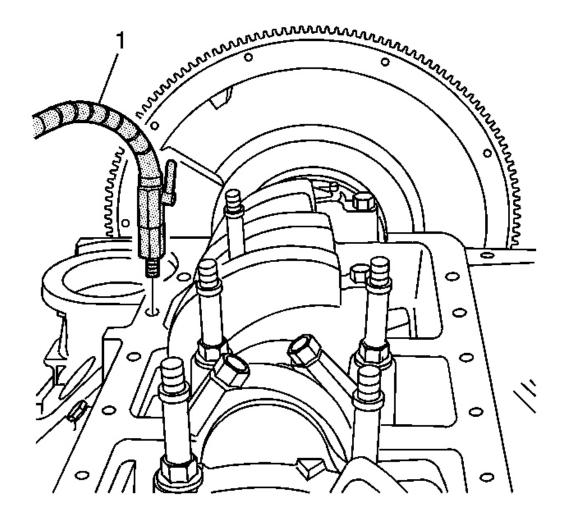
View Of Swivel Base & Oil Pan Rail Courtesy of GENERAL MOTORS CORP.
